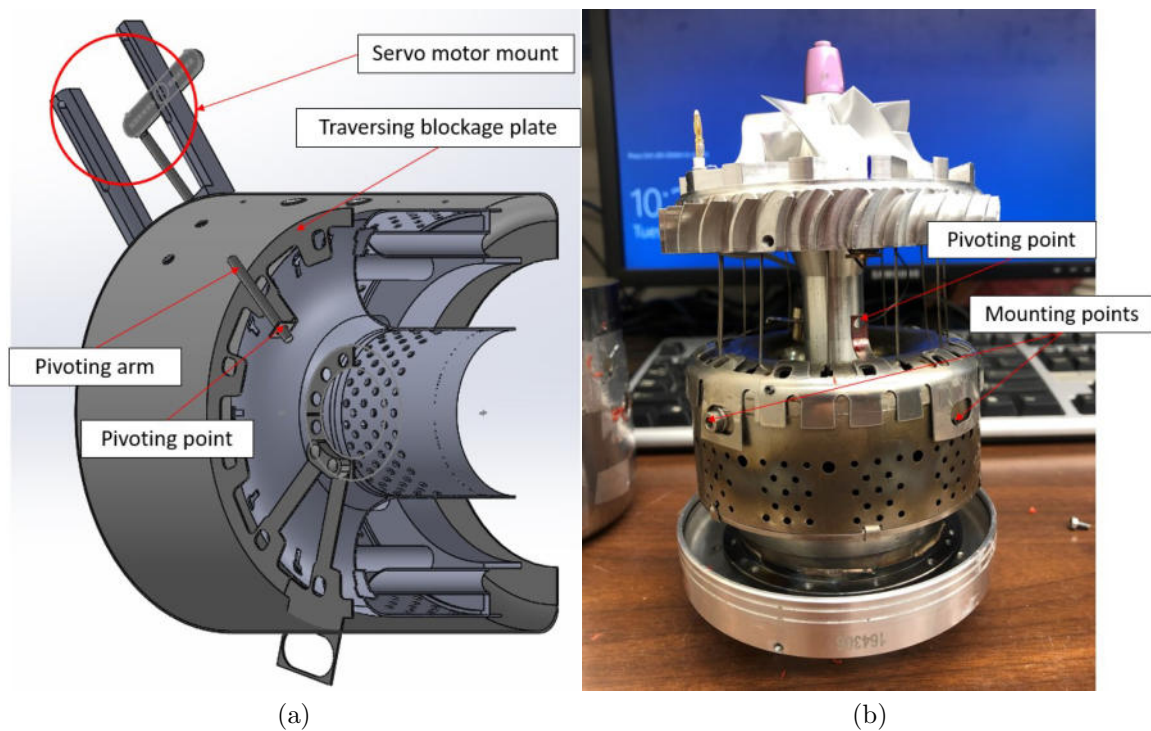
(a) CAD model of the blockage plate assembly versus (b) the manufactured blockage plate assembly fitted to the combustor liner
